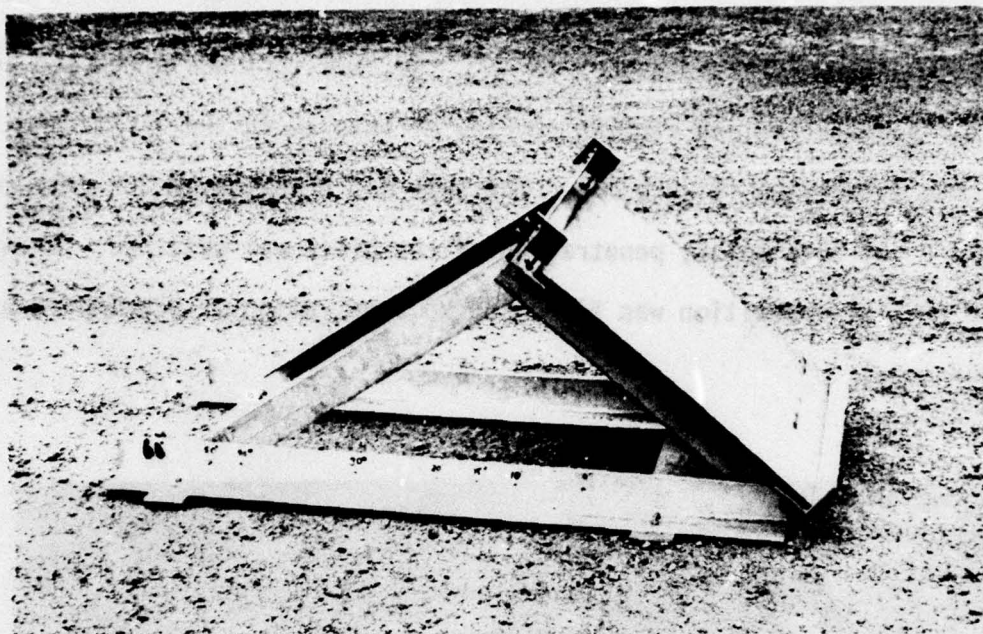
SIDE VIEW OF HOLDING FIXTURE
